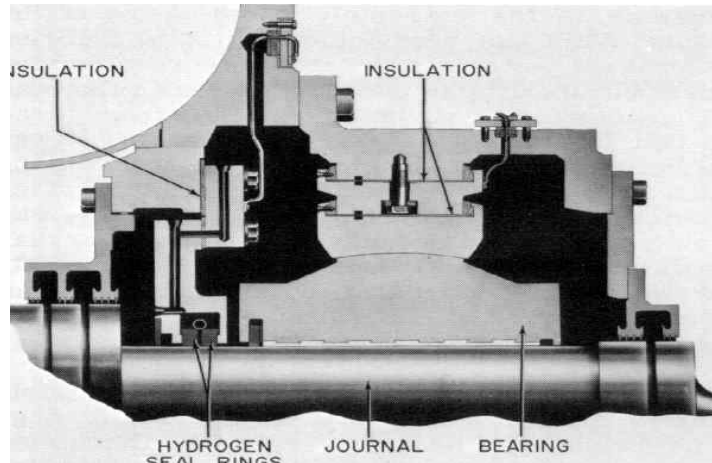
Hydrogen Seal/Bearing Assembly with Insulation Components
